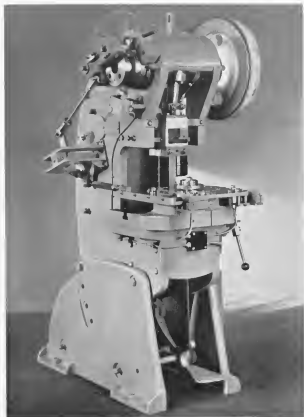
Dial feed. Guard removed for purpose of photograph.
